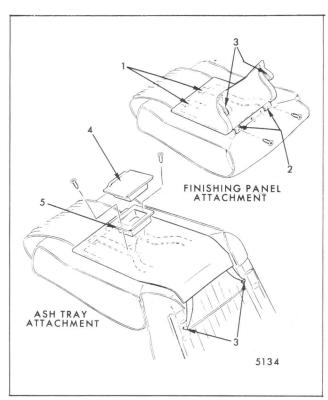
Salon Bucket Seat Back Ash Tray and Finishing Panel
